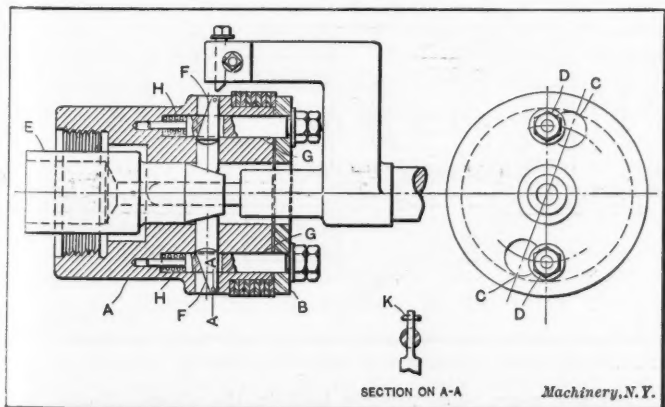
Adapter used in Holding the Washers while Turning their External Diameters
